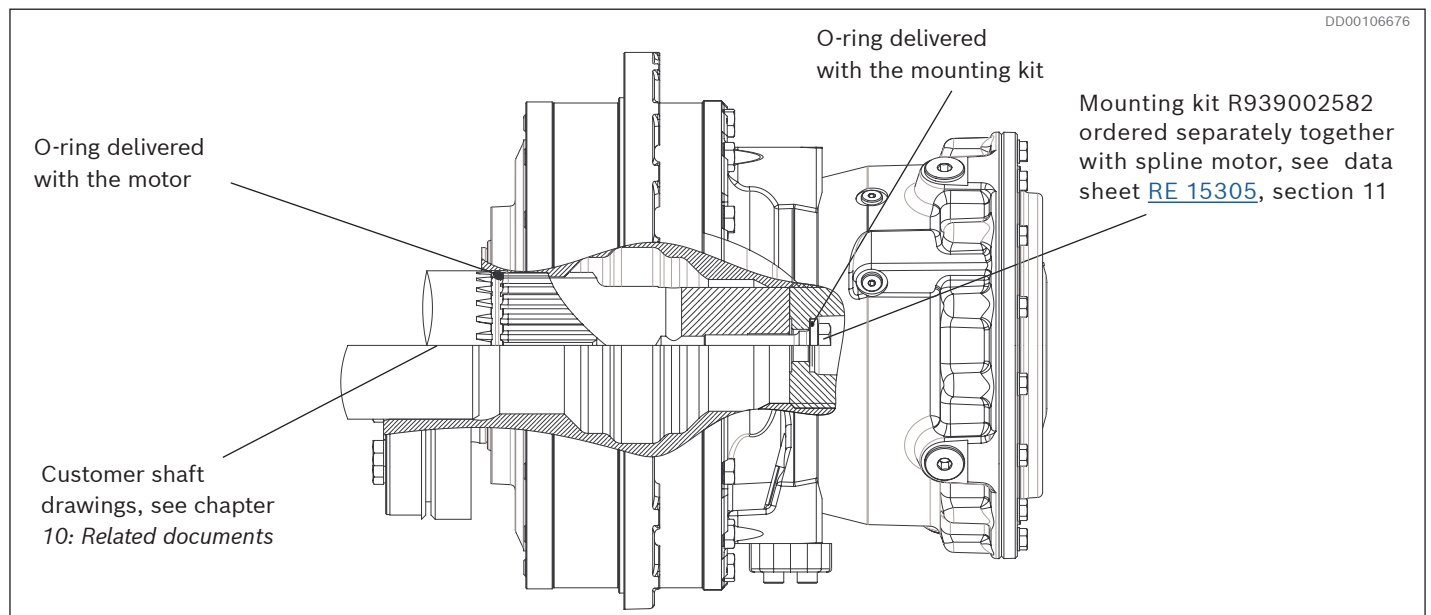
Example torque arm mounted CA motor with spline or shrink disc coupling and MDA brake on customer shaft
